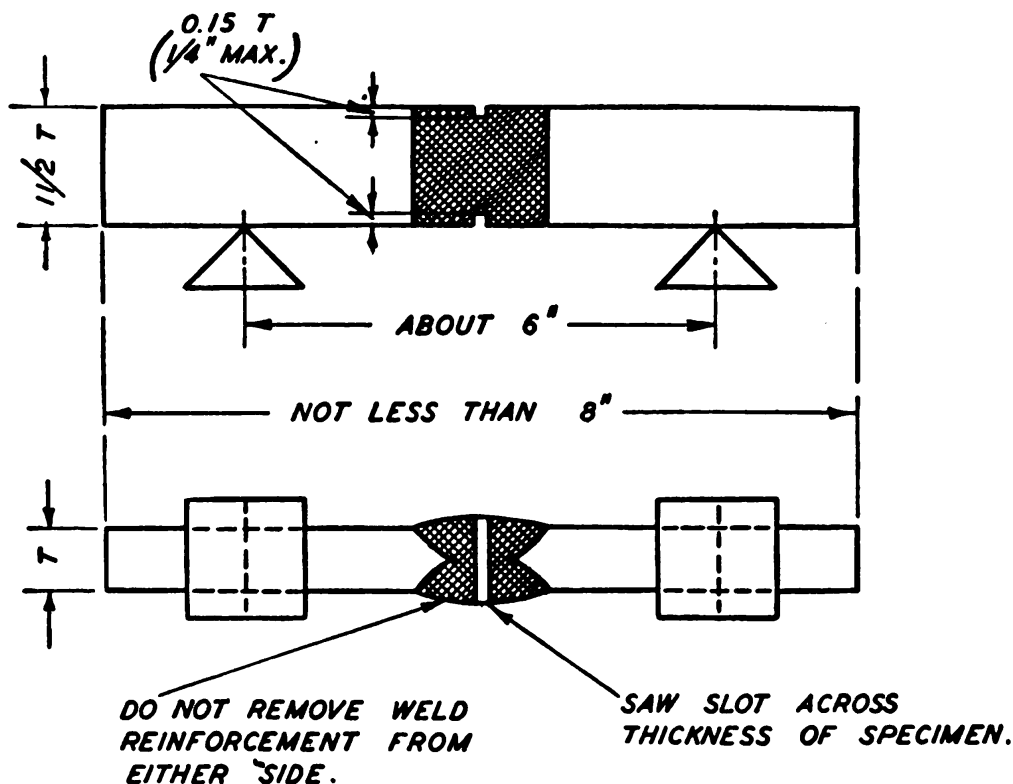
Nick-break test for inspection of weld metal.
